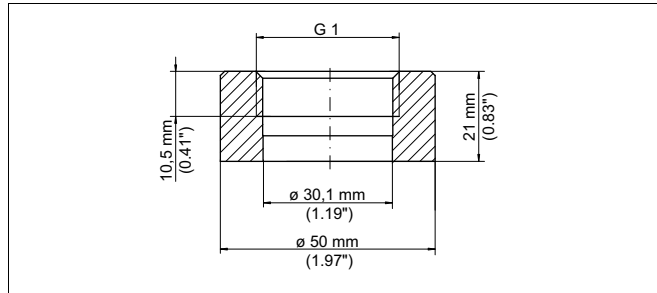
Dimensions welded socket G1 B acc. to ISO 228-1
